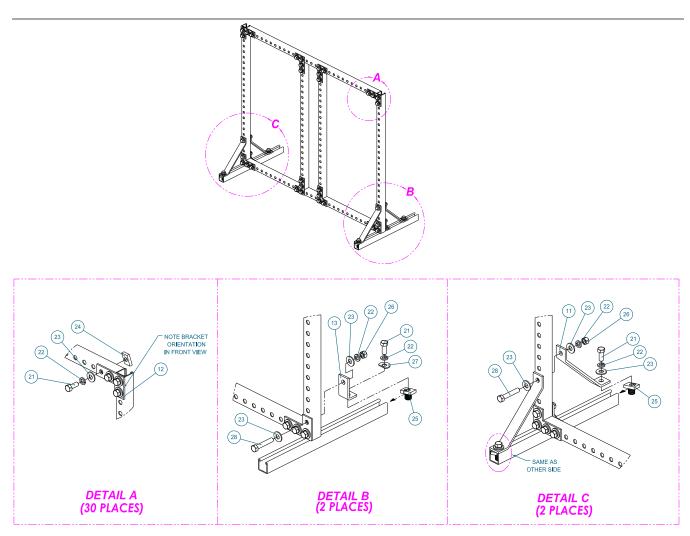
Uni-Strut Assembly, Hardware Placement
